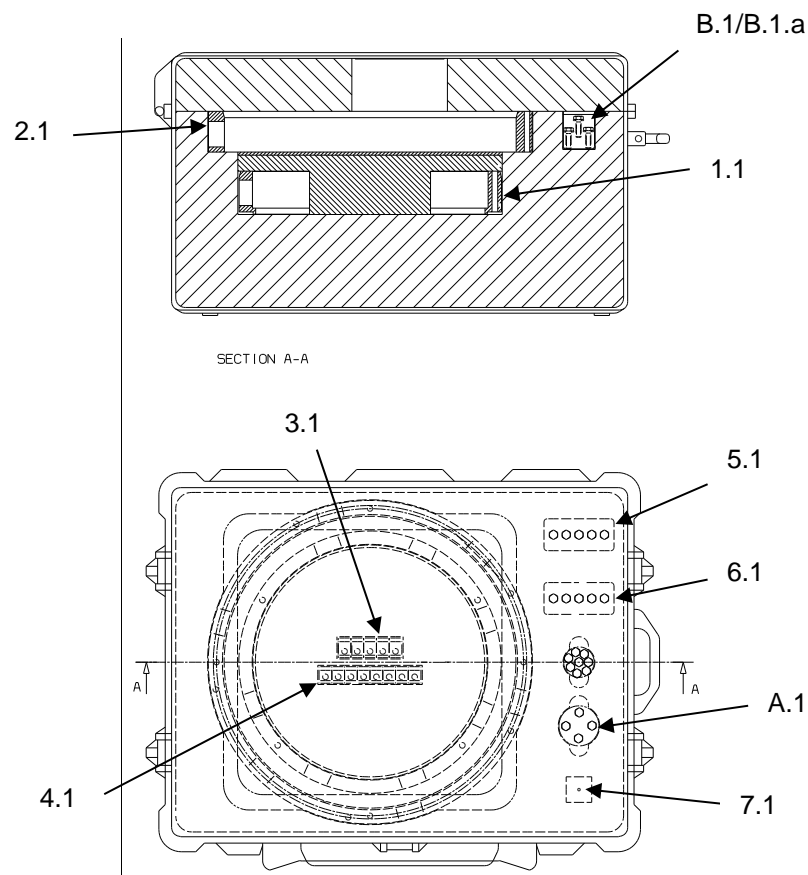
Tool Kit, Swashplate Assy Assembly Case 1 Main Parts
